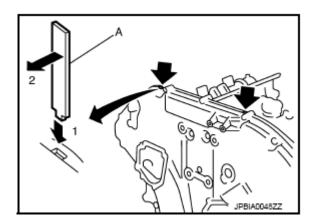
Cutting Liquid Gasket Using Seal Cutter Courtesy of NISSAN NORTH AMERICA, INC.
